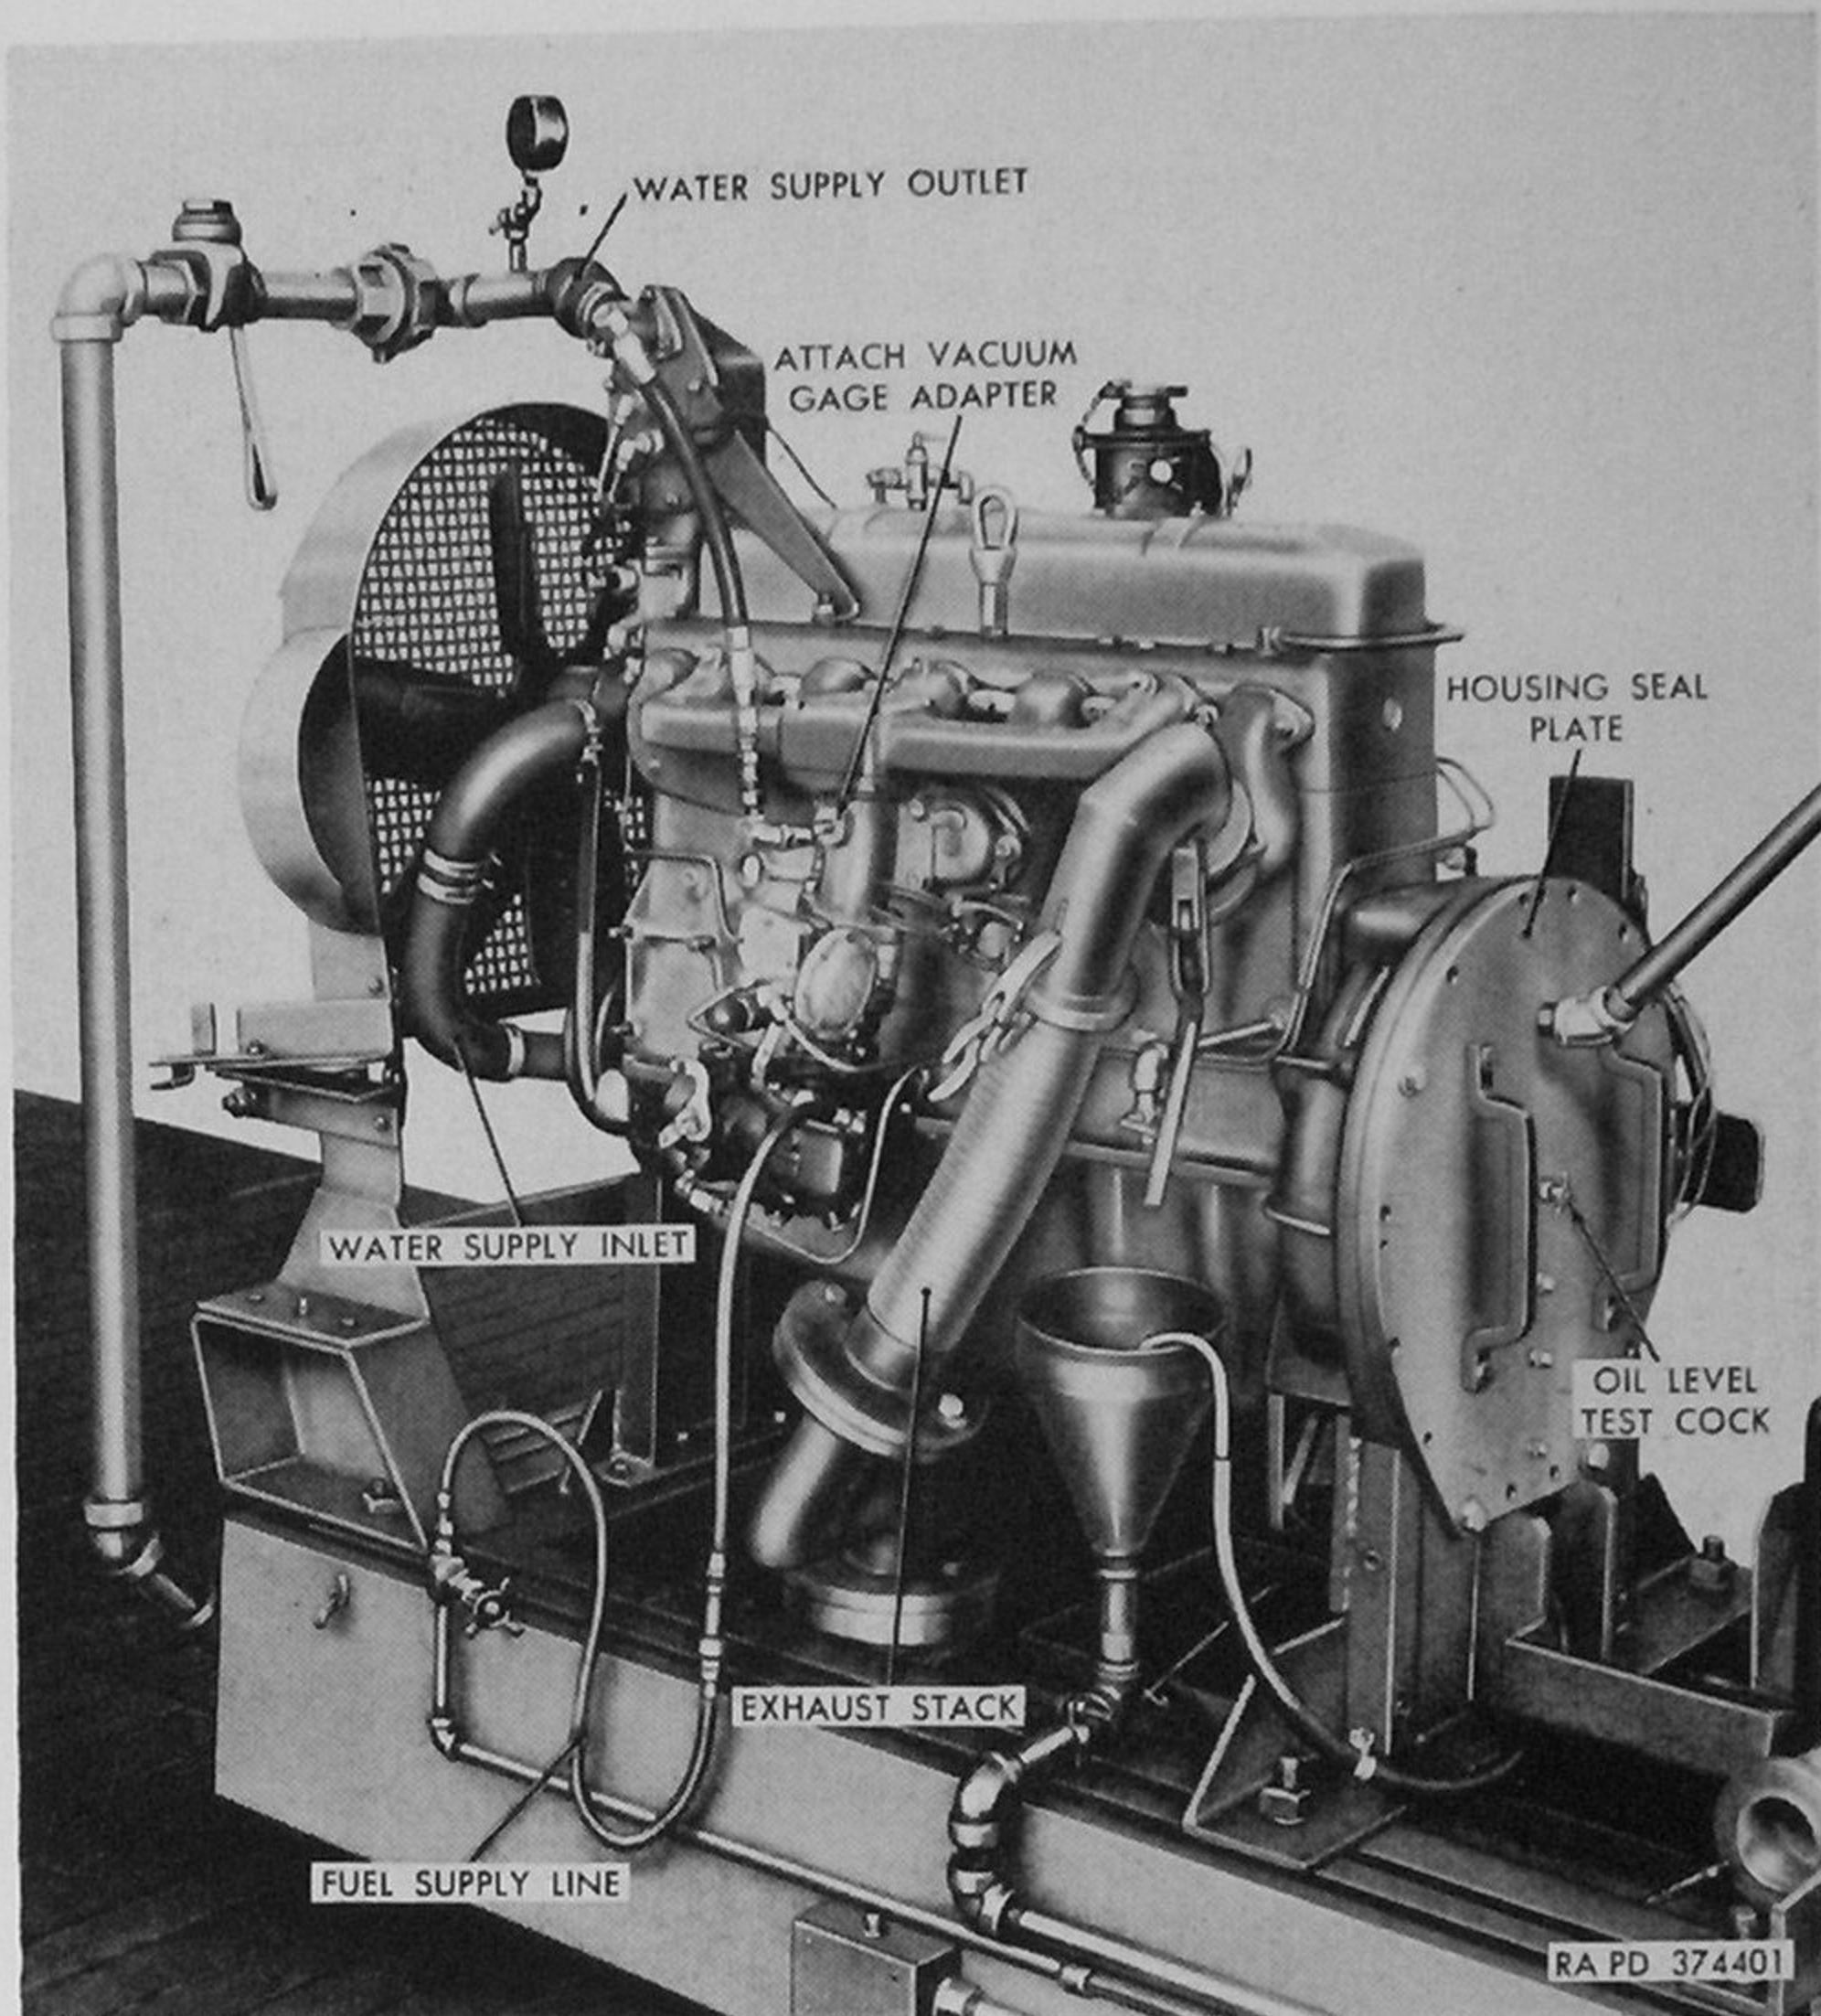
Engine assembly 8726920 in typical test stand (left side shown).
